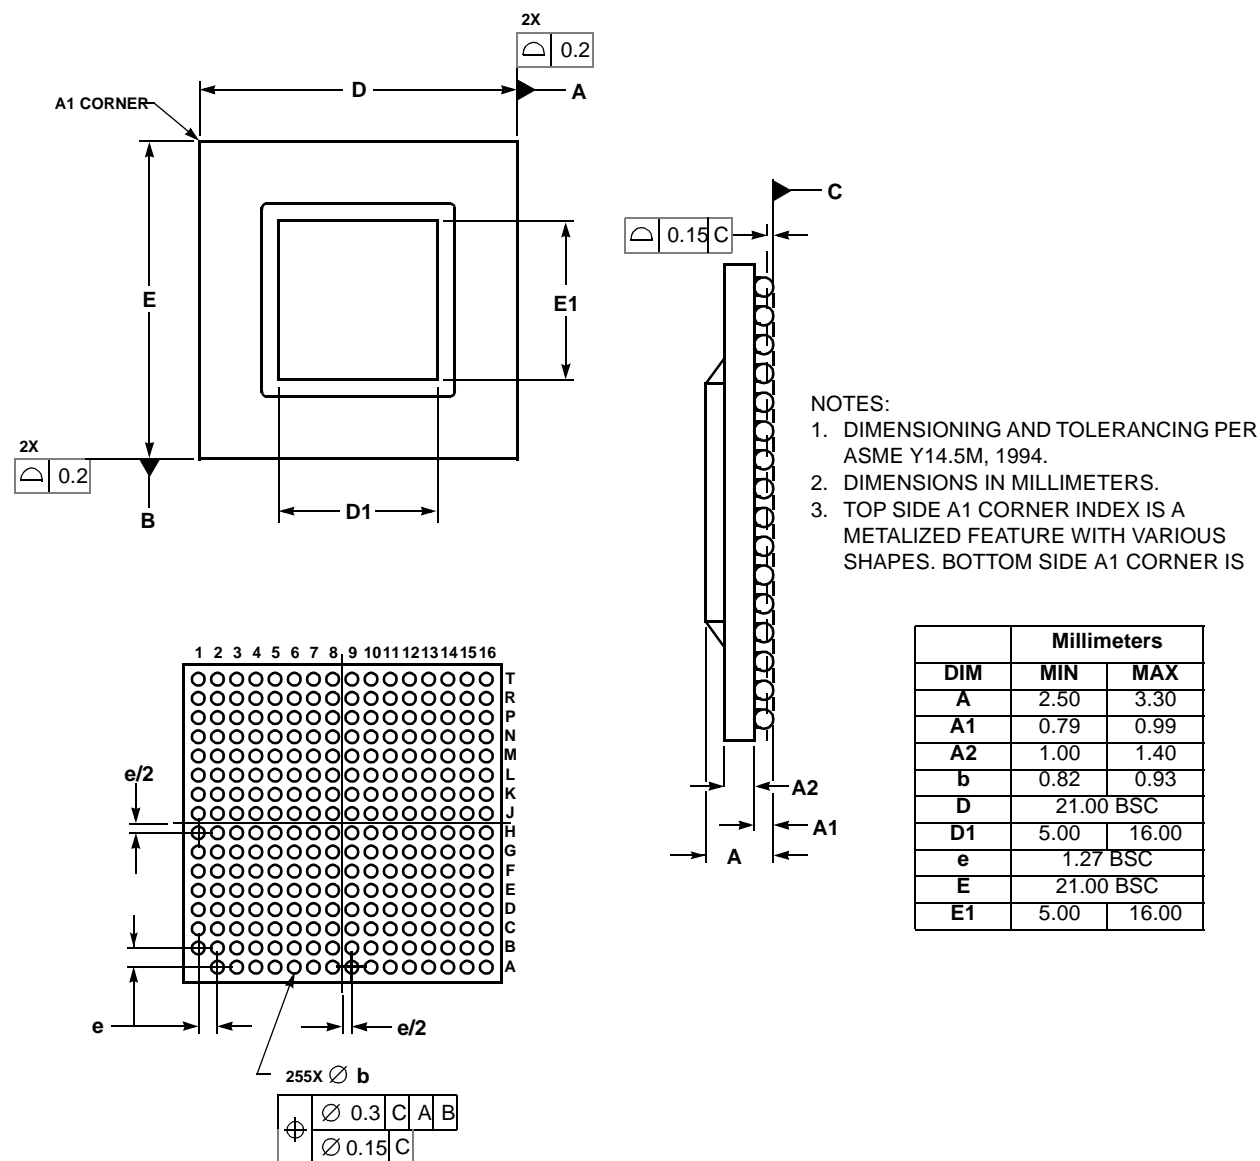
Mechanical Dimensions and Bottom Surface Nomenclature of the CBGA Package
